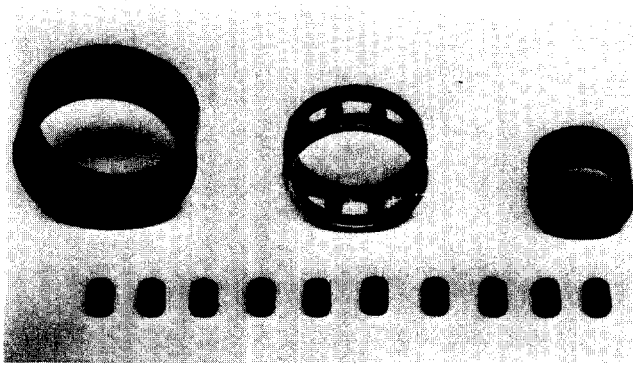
NC-132 HPSN roller bearing tested in an engine 50 min at 39 000 rpm without lubricant.
